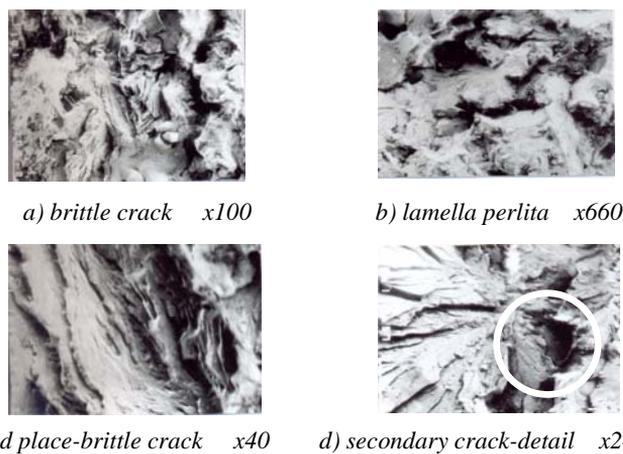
Micro-fractography of crack surface in the sample located towards axle core.
